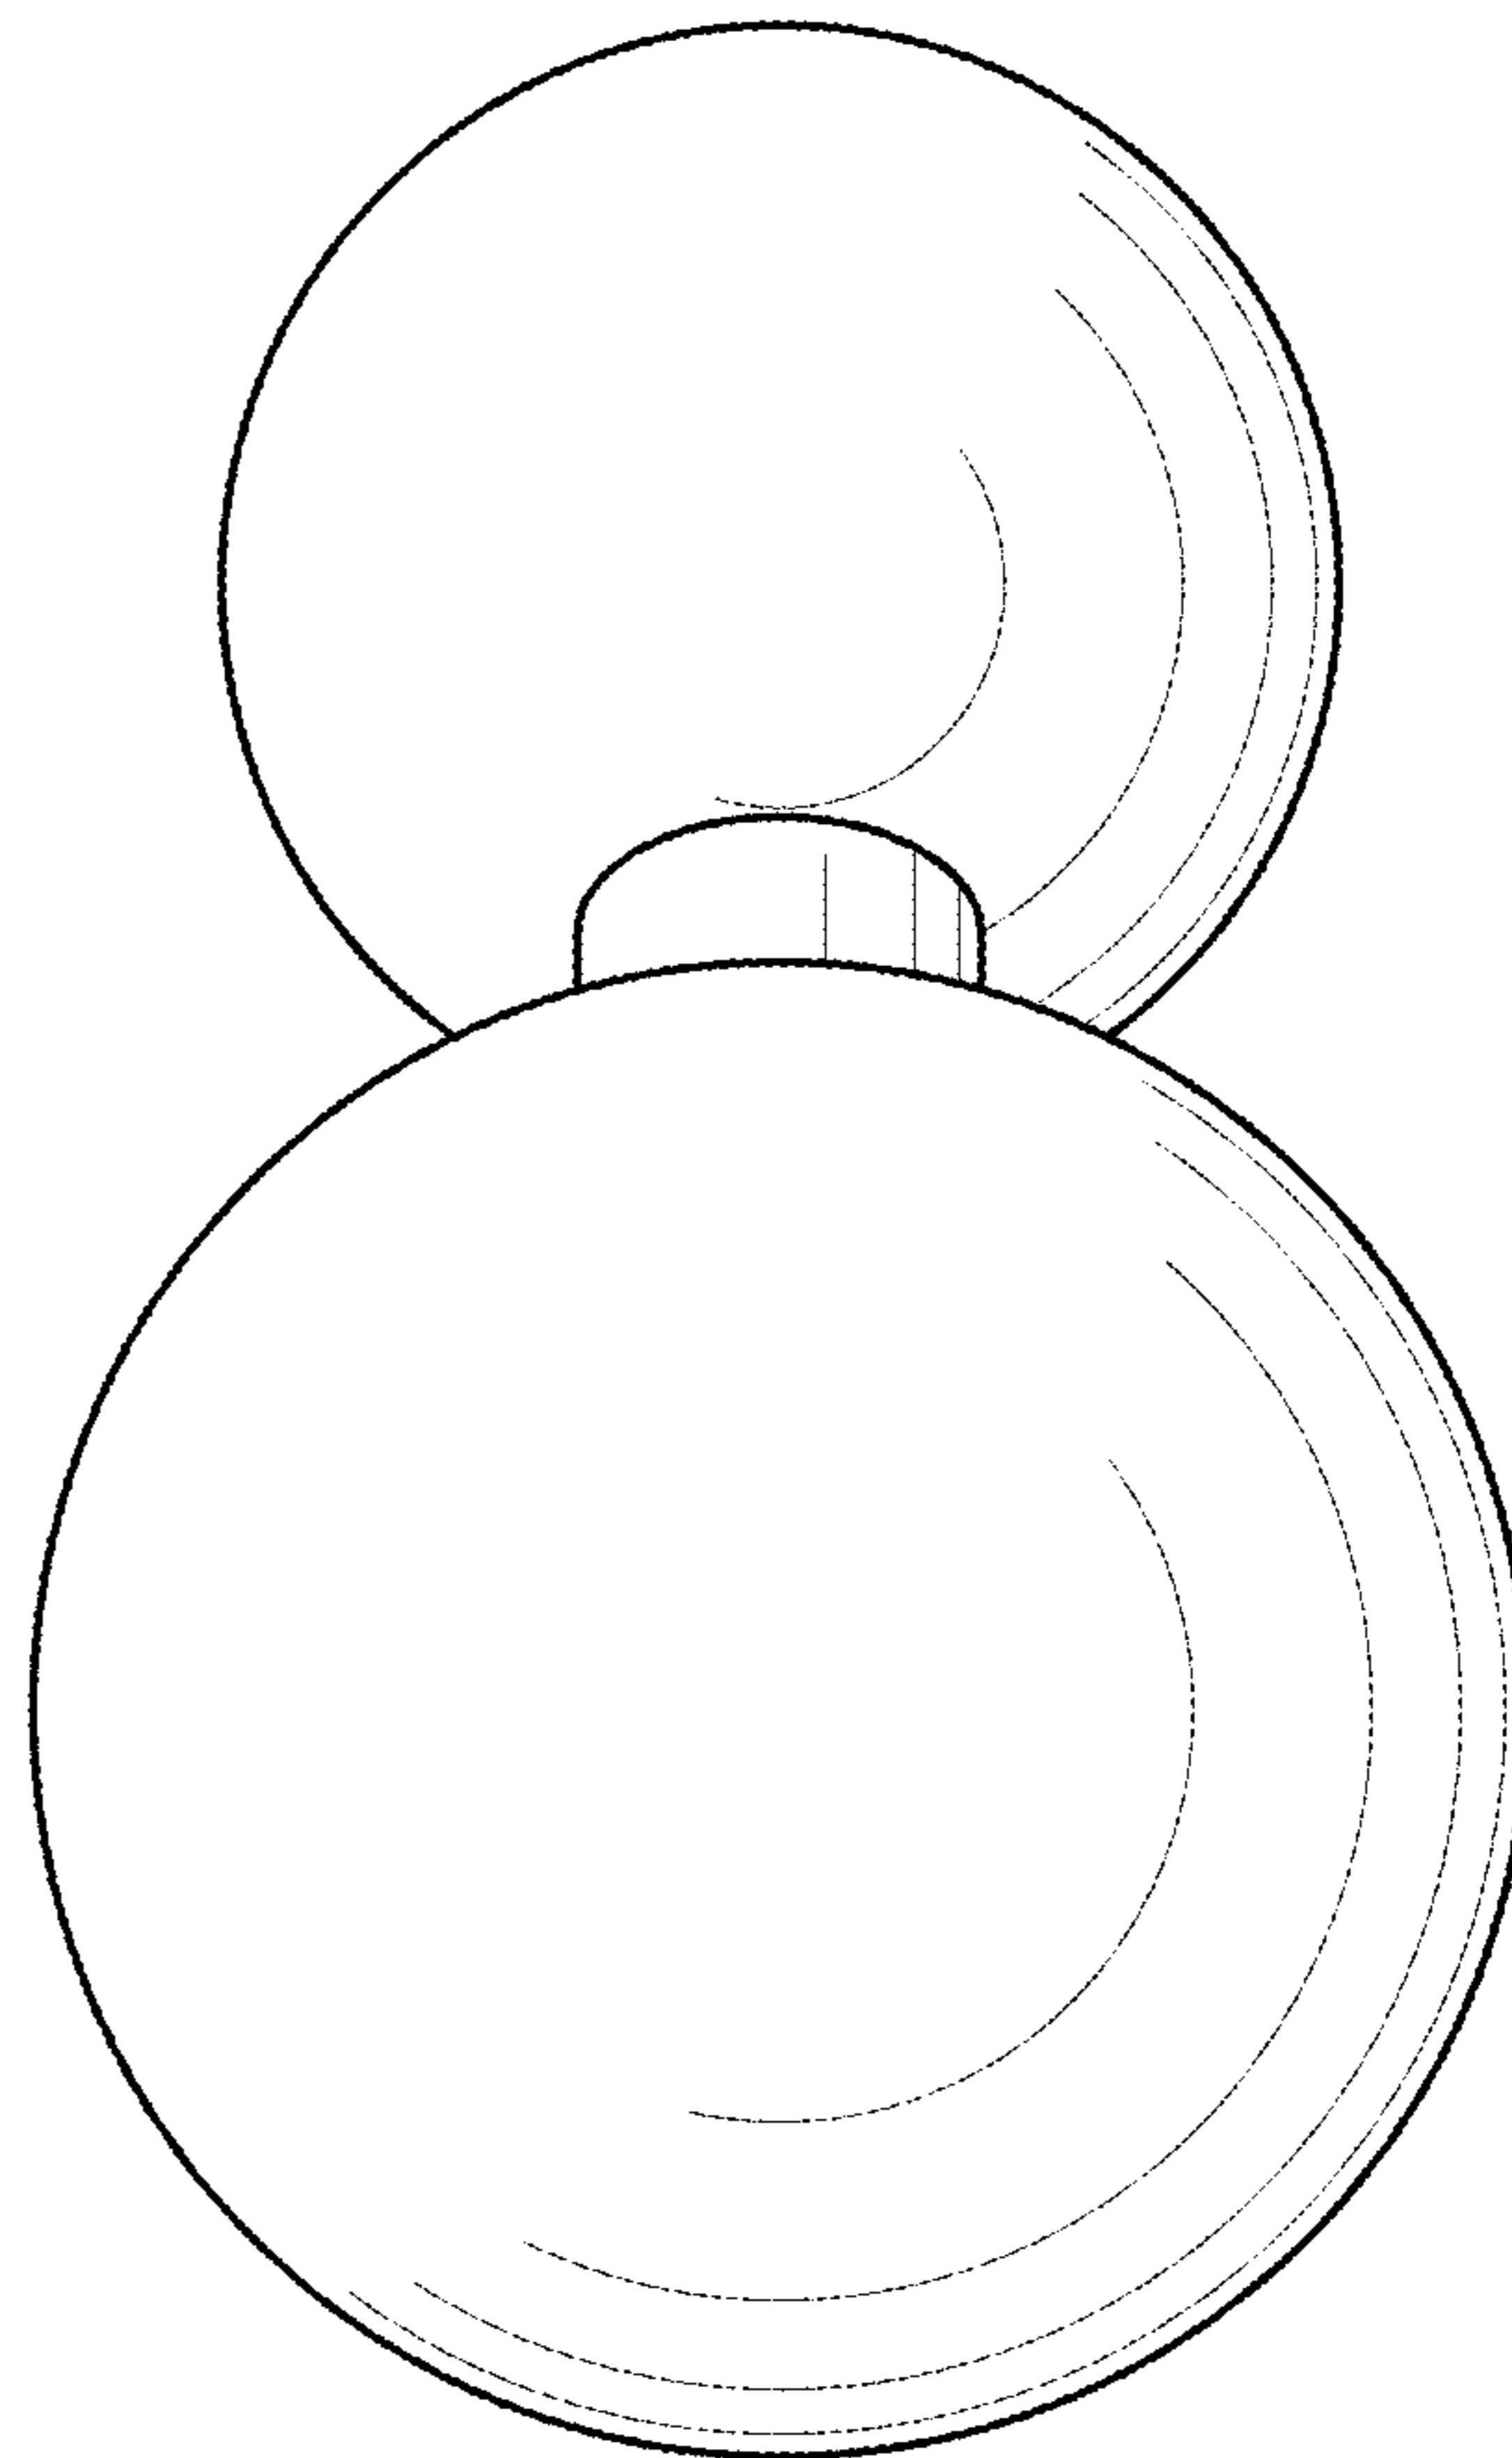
is a perspective view showing the front, top, and left sides of the puppet double ball joint;
